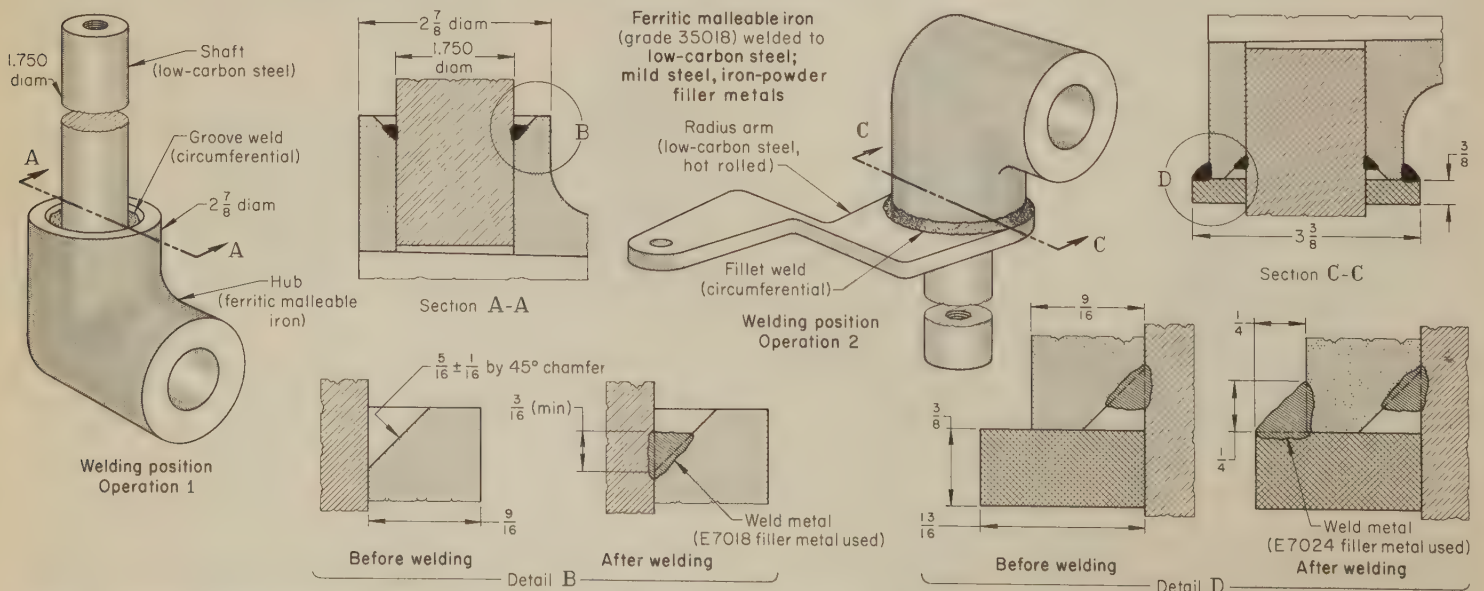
Steering-knuckle assembly, and details of shielded metal-arc welds made to join the ferritic malleable iron and low-carbon steel components (Example 238)
